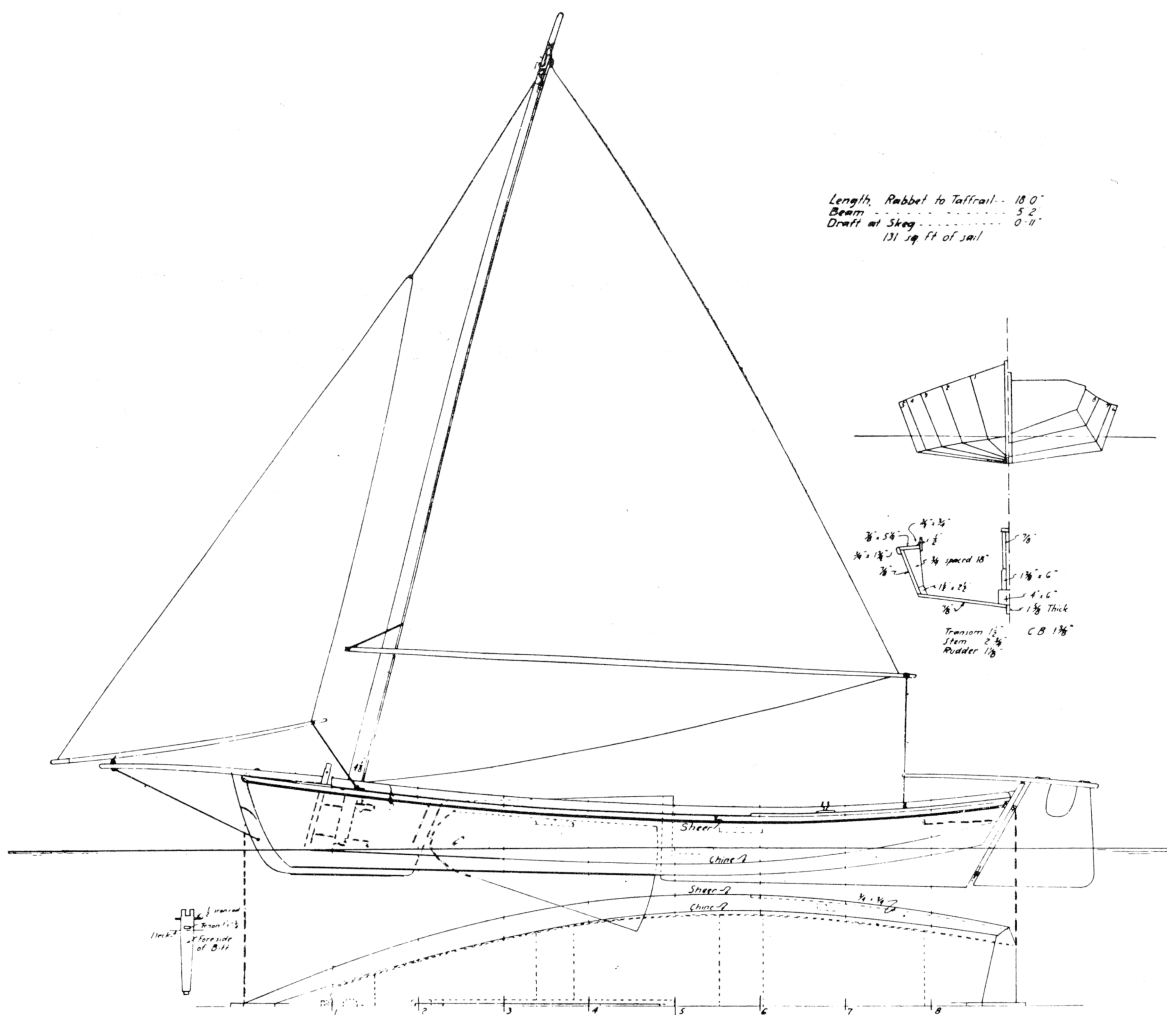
An 18-ft. sloop or skipjack rigged bateau built at Cambridge, Md. about 1910. Lines taken off Sept. 16, 1940.
